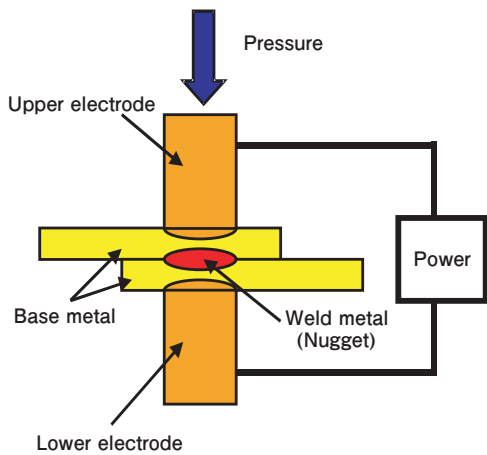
Schematic drawing of resistance spot welding.
